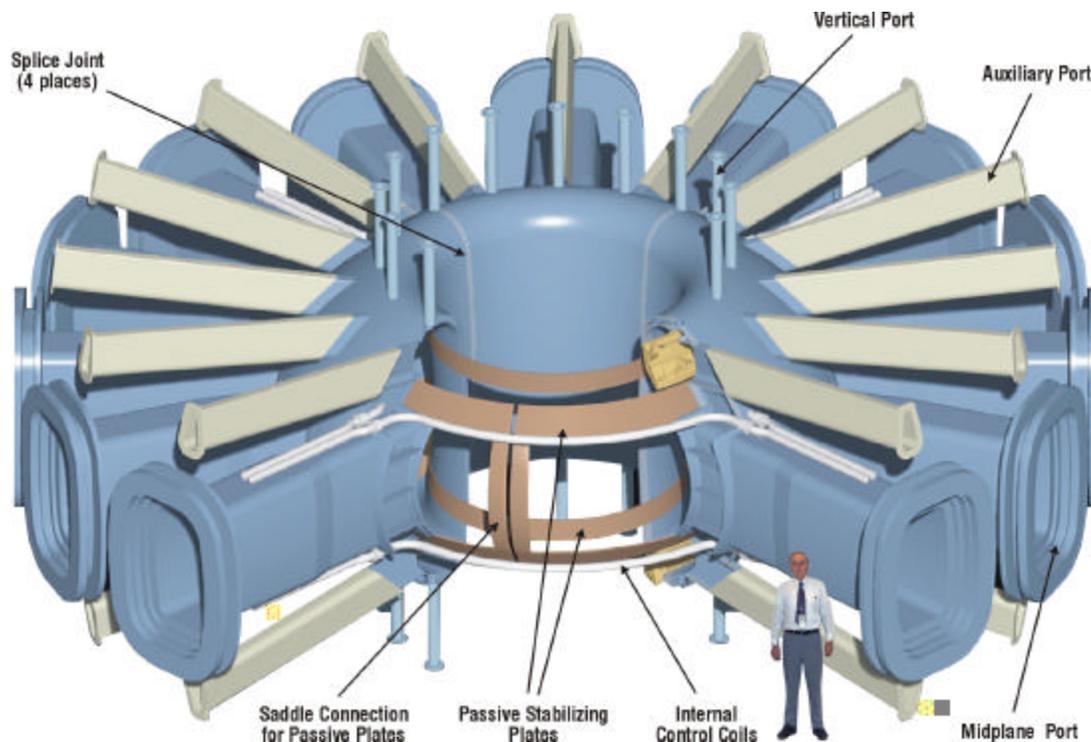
Cutaway view of vacuum vessel with port extensions.
